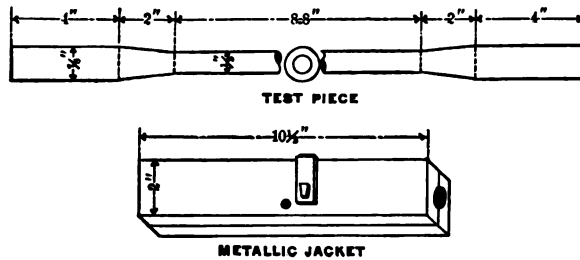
TEST-PIECE AND METALLIC JACKET.
